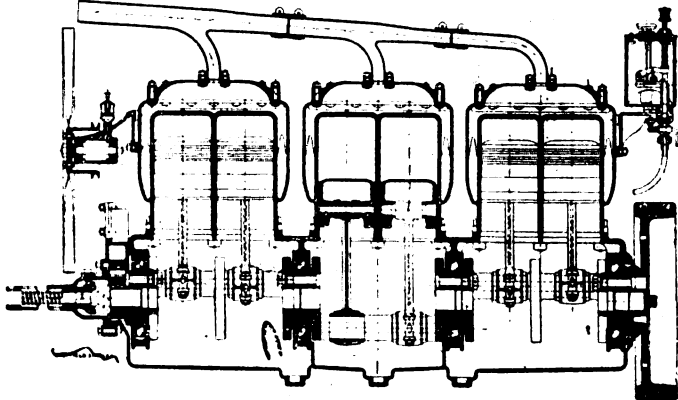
Sectional Elevation of "Sheffield-Simplex" 45-h.p. Six-Cylinder Engine.
